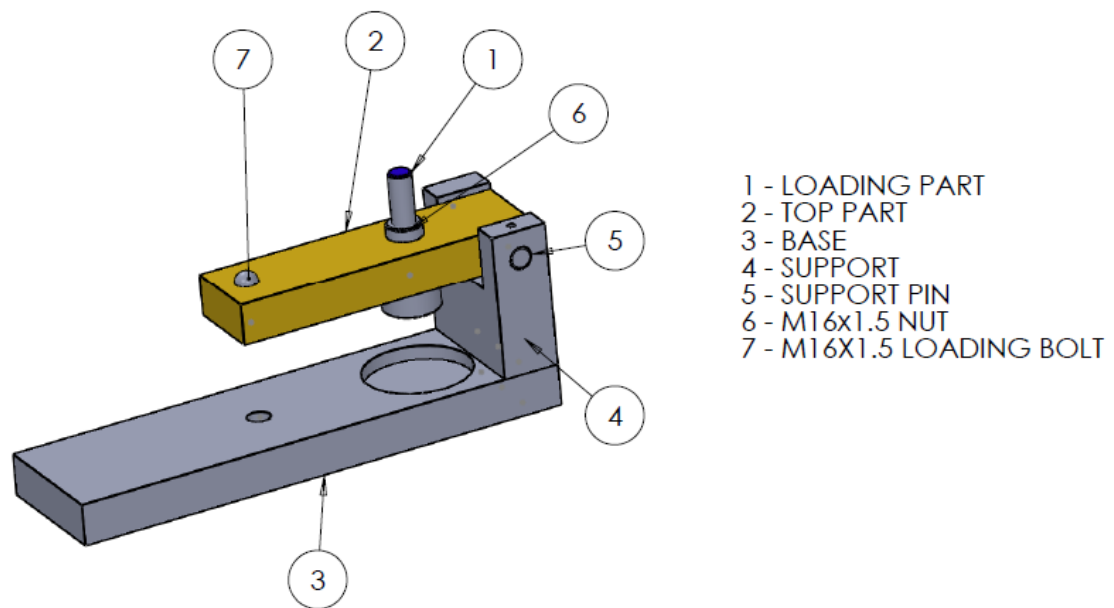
Diagram showing the assembly model of the loading fixture used to magnify the load applied by mechanical testing machine onto the sample, with annotations showing the individual parts of the fixture. The drawings can be found in Appendix E.
